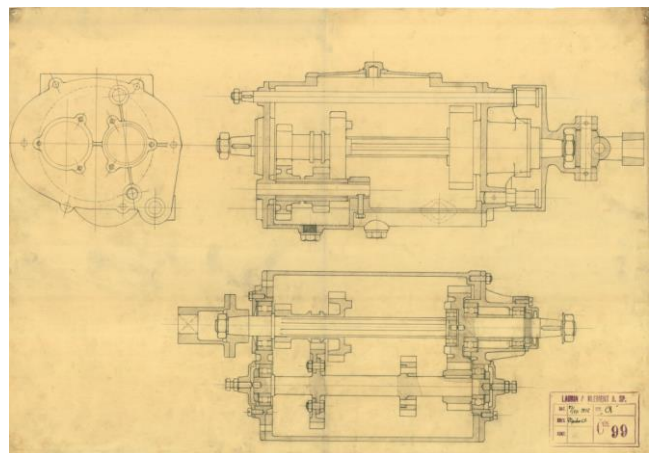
Voiturette A (1905-1907), transmission - technical drawing
